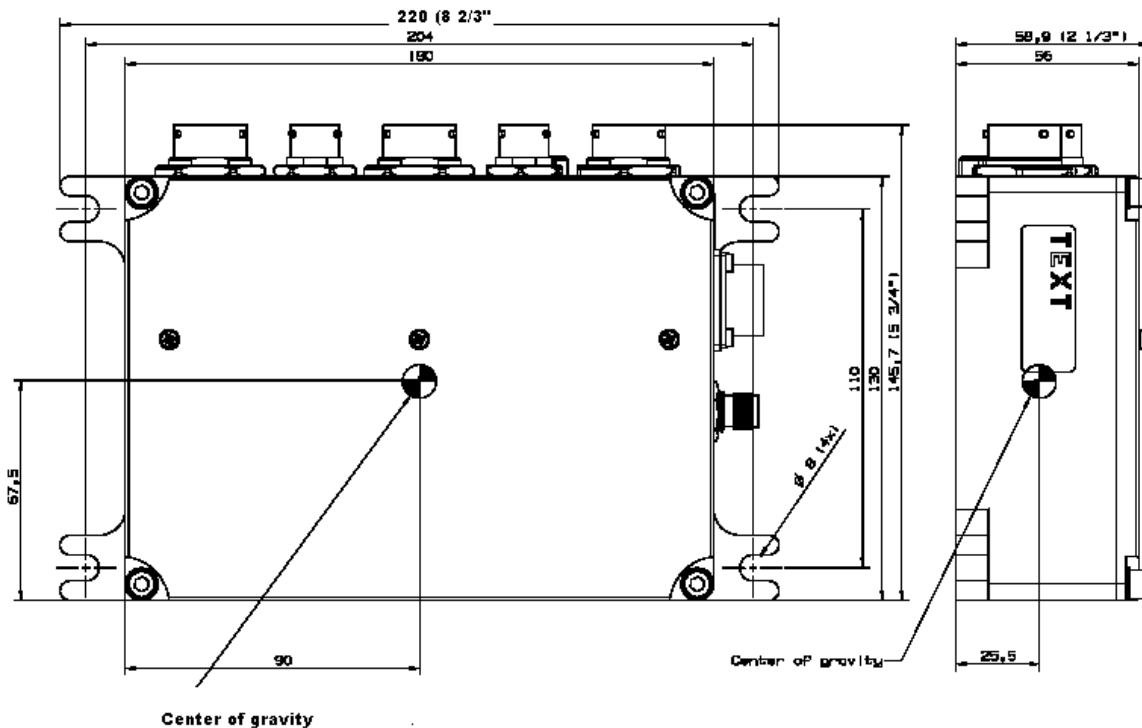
TAP Unit Dimensions (Inches)
